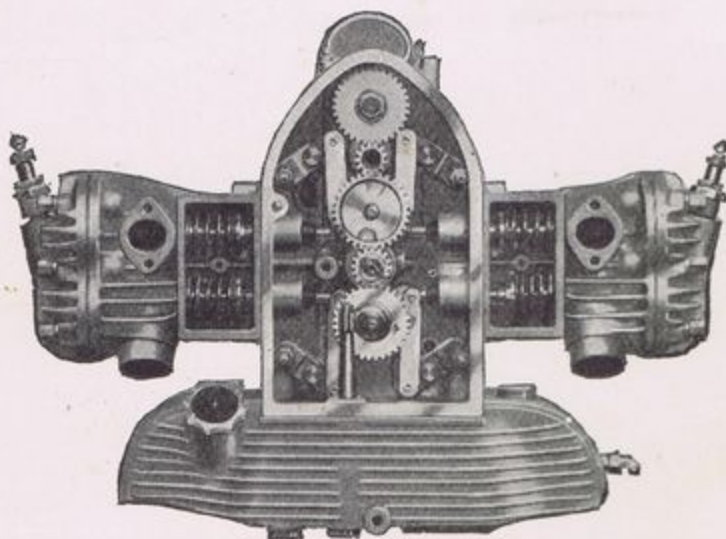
VIEW OF 500 AND 600 C.C. S.V. ENGINE WITH TIMING COVER REMOVED
